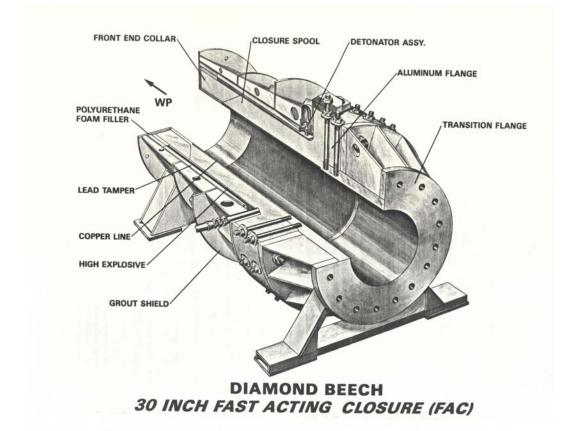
Isometric drawing of the DIAMOND BEECH FAC.
